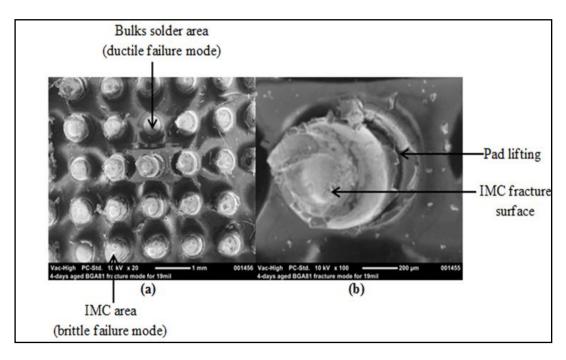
SEM of failure mode classification for 4-days aged 19mil pad size, with (a) bulk solder/IMC fracture, (b) pad lifting/IMC fracture
